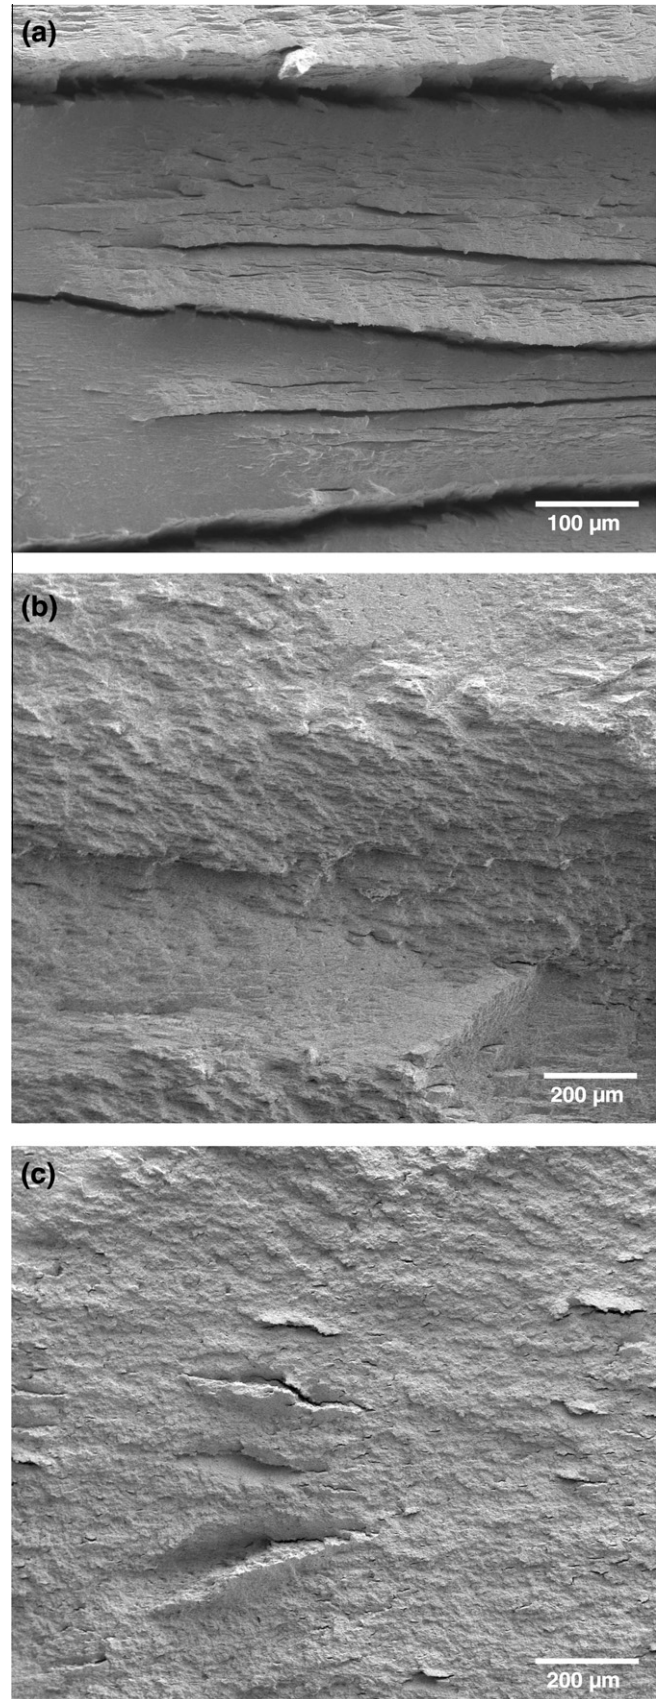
Low magnification fracture surfaces obtained from: (a) RT, (b) 500 °C and (c) 700 °C tests. Crack propagation occurred from right to left.
